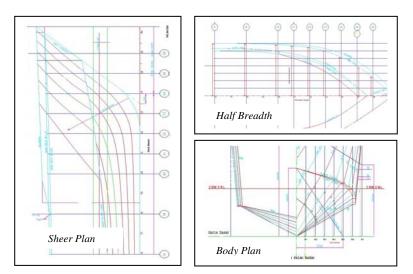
Body plan, Half Breadth plan and Sheer Plan
